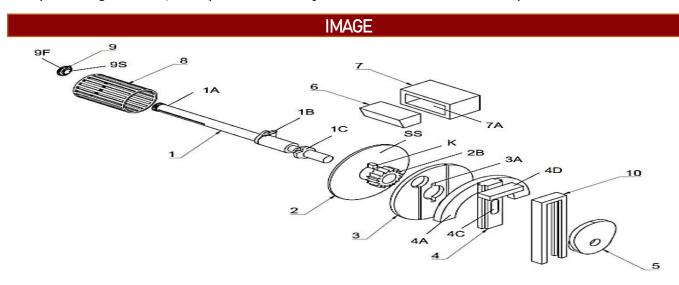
B(Above): Depicts exploded perspective front view of the mechanism for locking a seat belt in a vehicle
